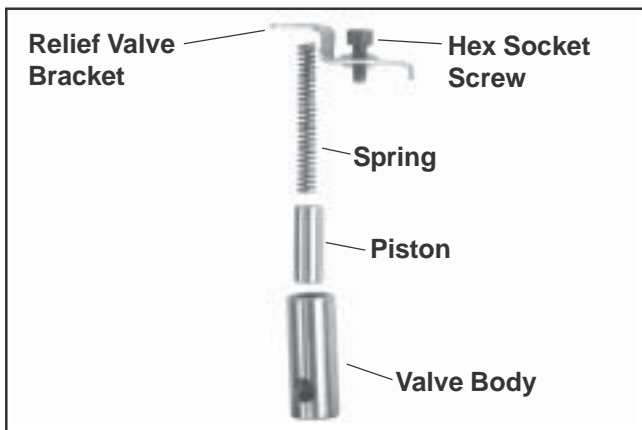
Five-Piece Oil Pressure Relief Valve.
